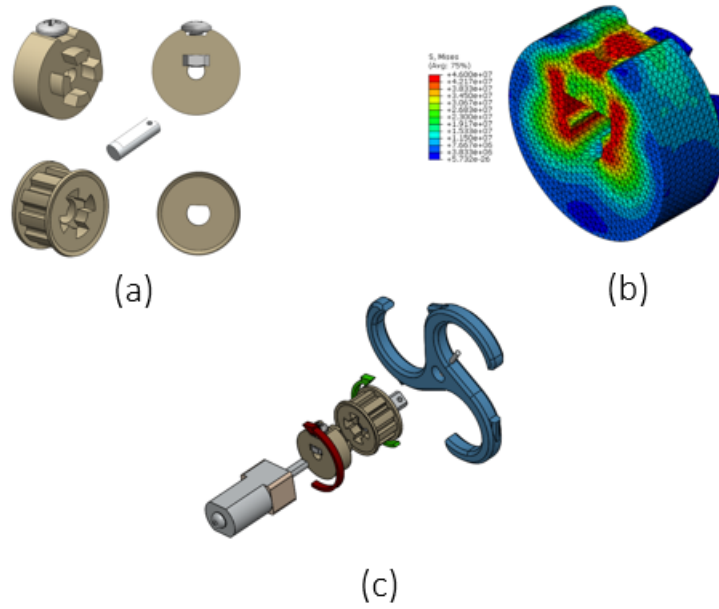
(a) shows the mechanical design of the pulley and motor adapter. We have them separated to insert the aluminum axle which connects the robot's wheel at its end. (b) is the finite analysis on the motor adapter. The rotational torque from motor shaft causes the stress concentration area. (c) demonstrates the assembly method of the rear drive train. The direction torque is shown on the assembly.
